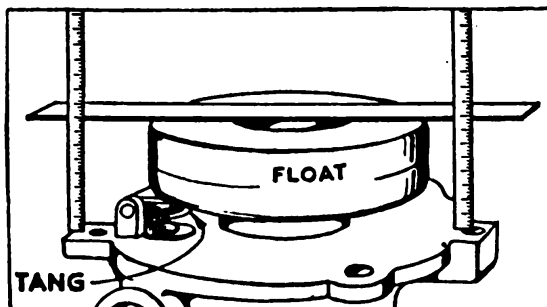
CARBURETOR FLOAT ADJUSTMENT
